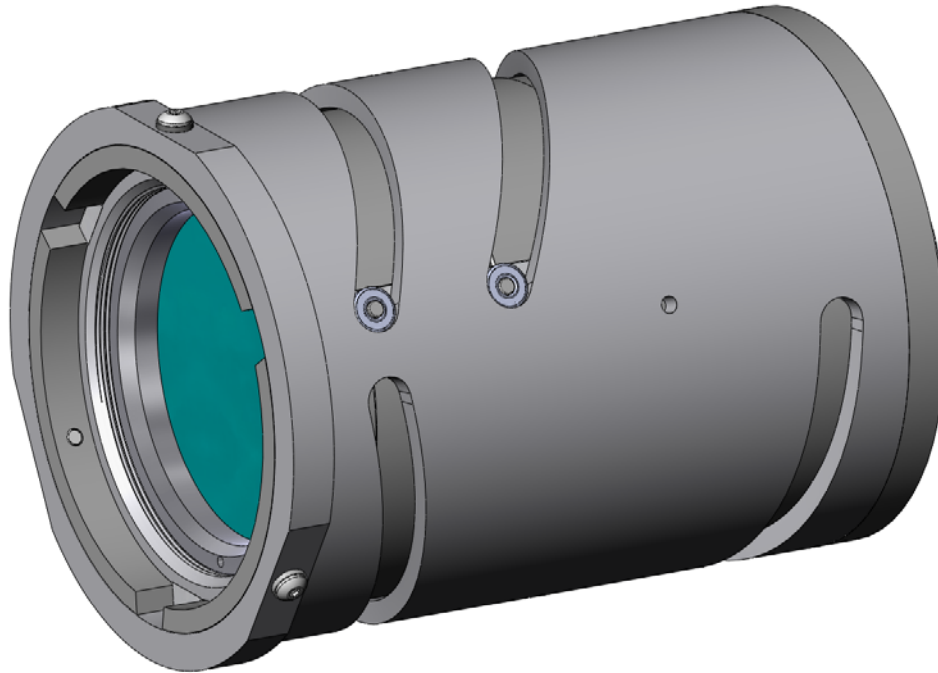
Cam installed on housing with lens mount bearings captured in slots and left side thrust bearing.
